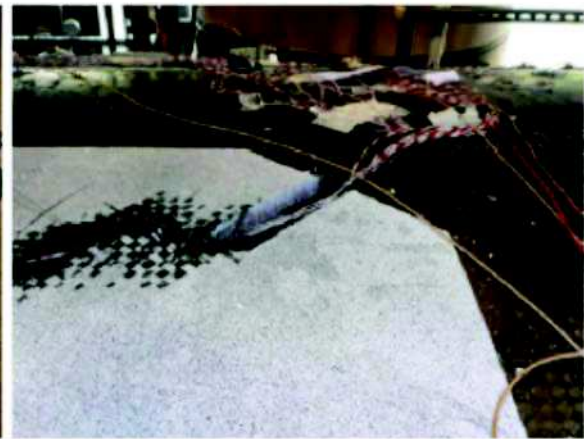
Notch-tip damage after complete final fracture in two sandwich panels. [177]
